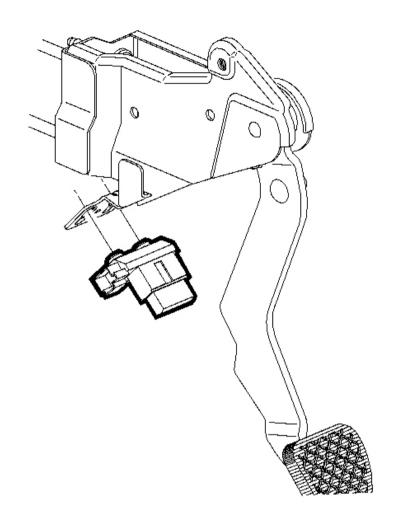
Clutch Pedal Assembly & Bolt Courtesy of GENERAL MOTORS CORP.
